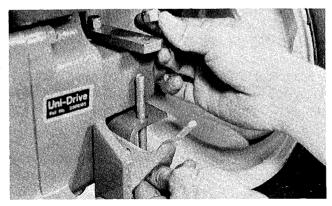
Install Two 3/8-16 x 3 3/4 Carriage Bolts & Nuts
